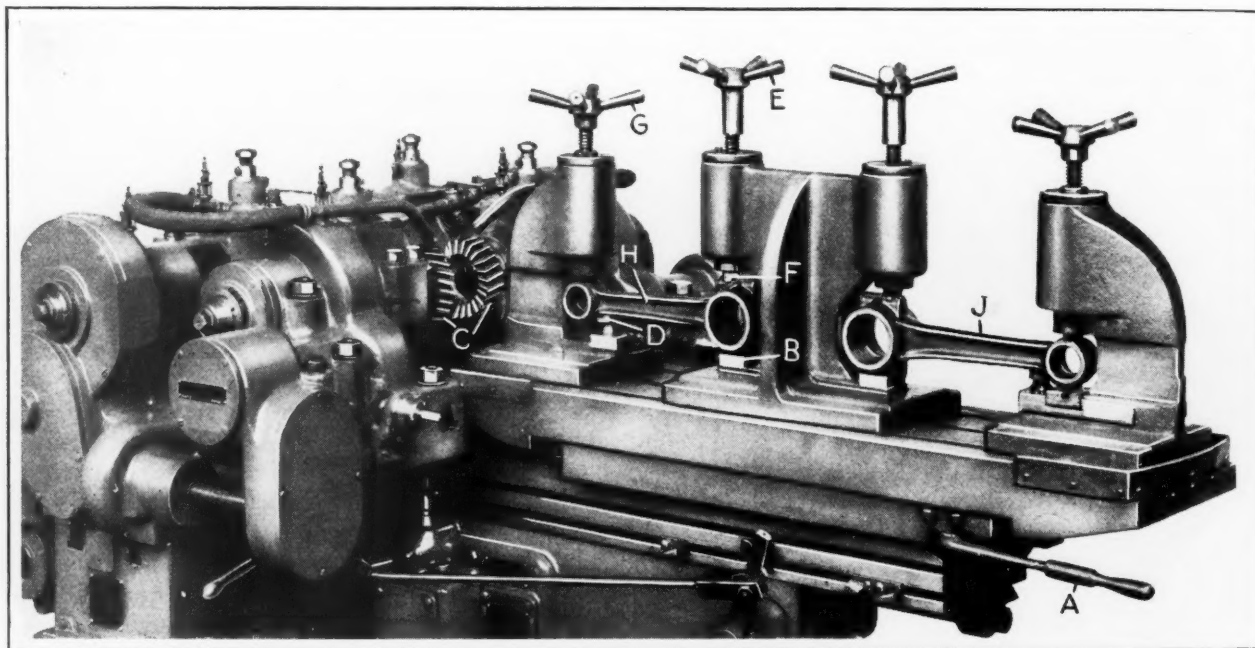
Indexing Type of Fixture Employed for Rapidly Milling Connecting-rod Bosses
